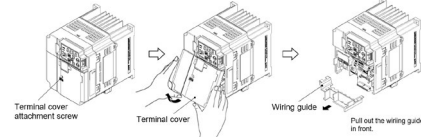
Removal of the Terminal Cover and the Wiring Guide (for VF1A-G04A1S4)
